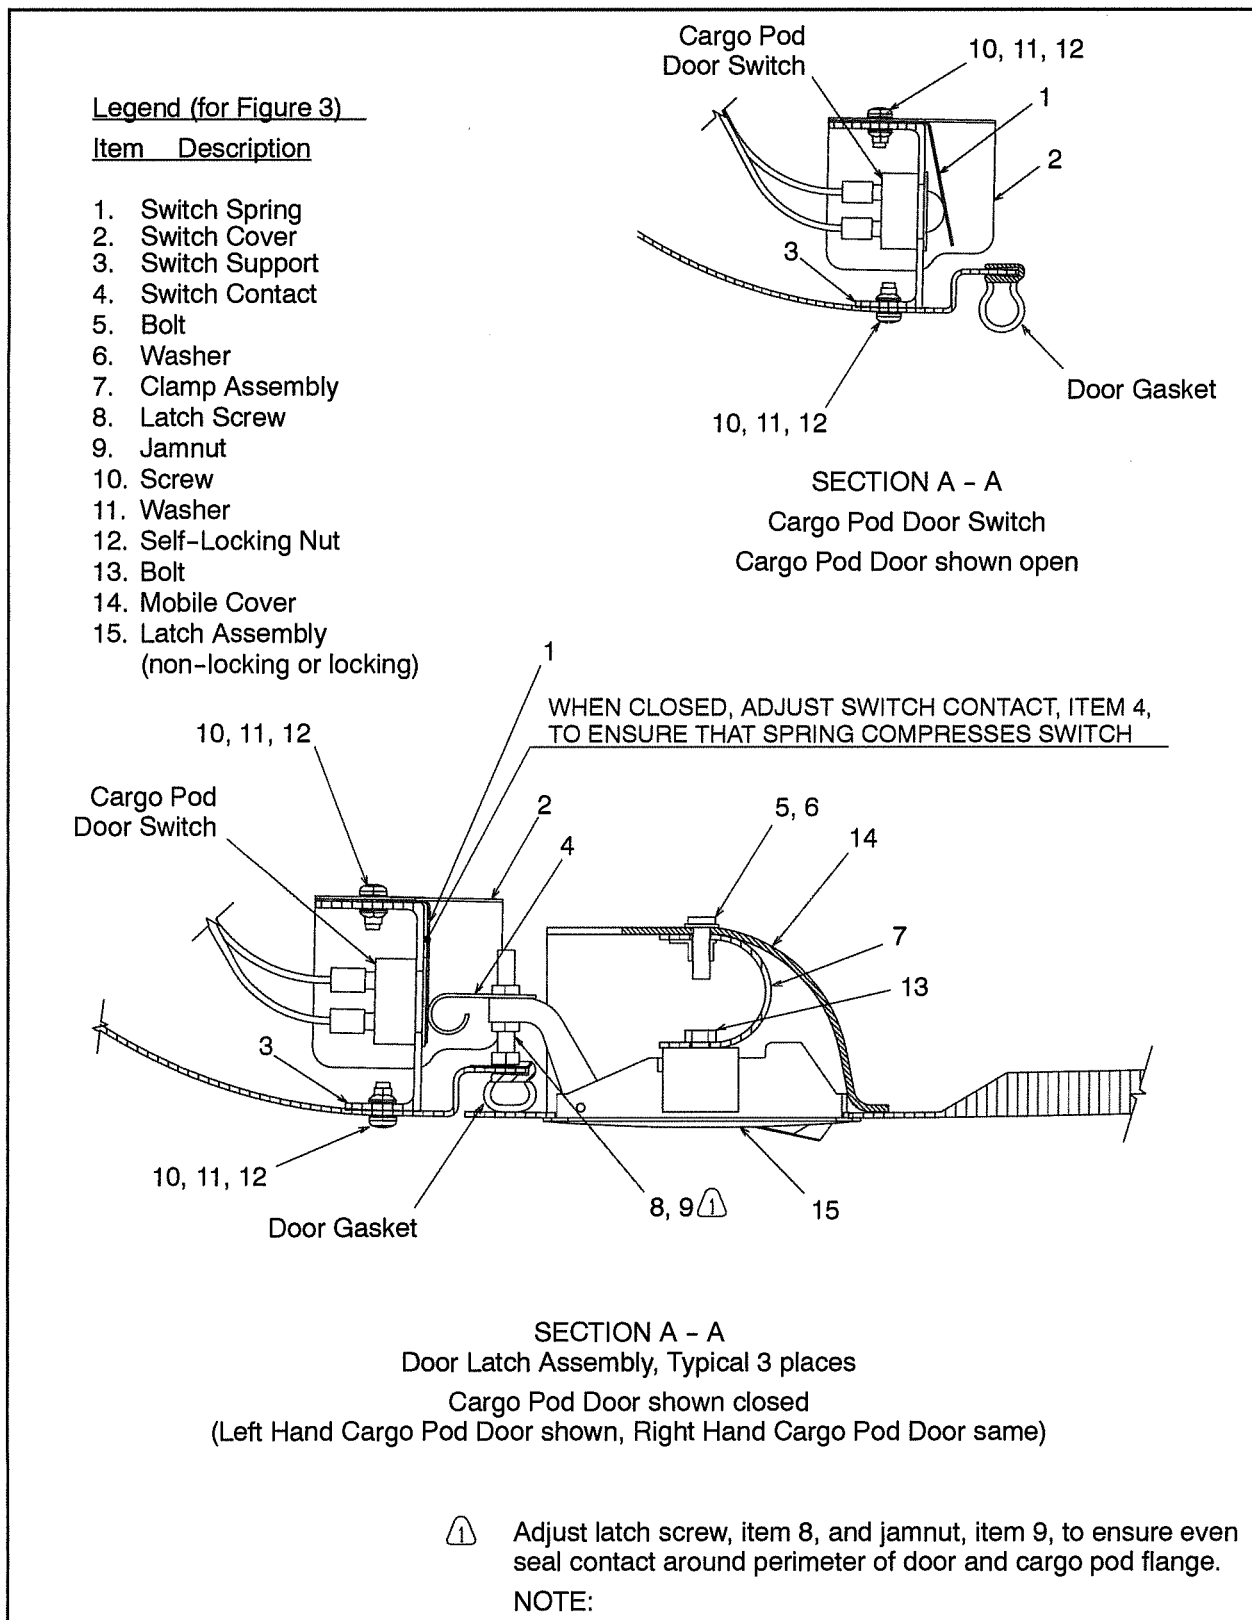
Cargo Pod Door Switch and Door Latch Assembly
